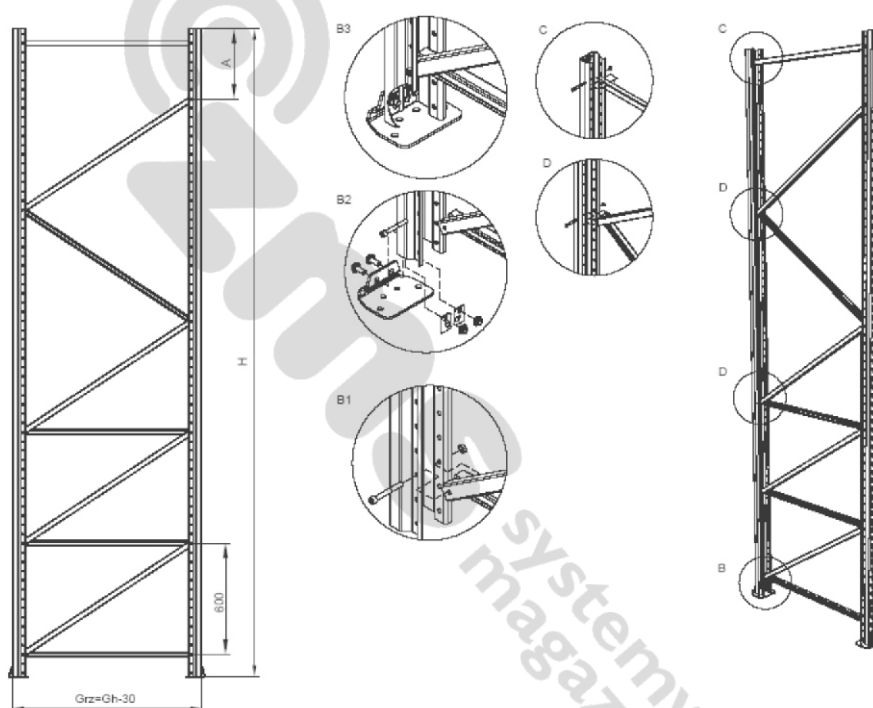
Assembly of a frame with HX 92 (ZZS) poles. ZZS brace system.
